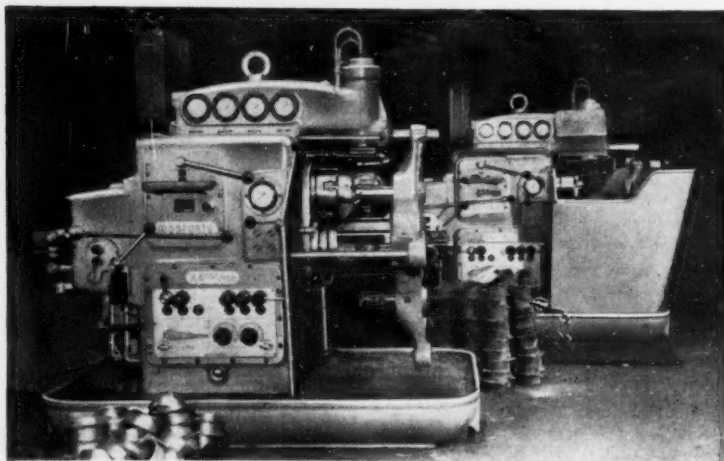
The Two Monforts Single-spindle Chucking Automatics Installed at the Works of Bristol Commercial Vehicles, Ltd., for Roughing and Finishing Operations on Bearing Housings for Gearboxes
